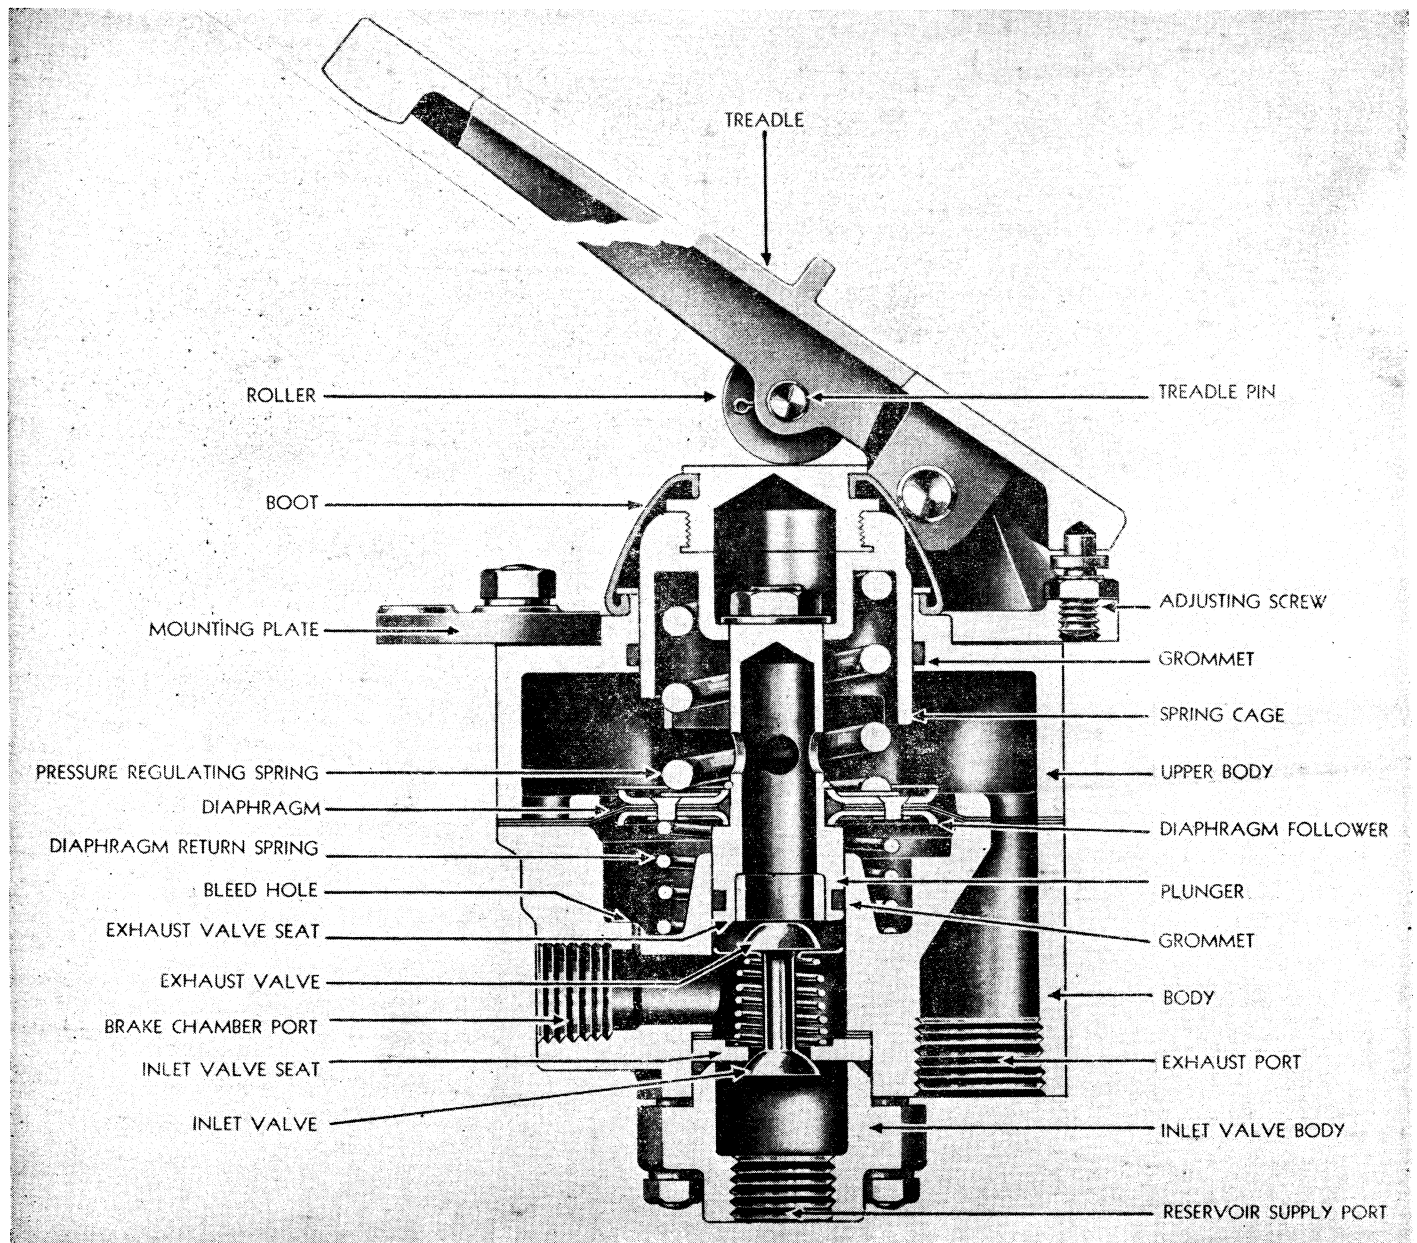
Sectional view of Type D-1 Treadle-Operated Brake Valve
